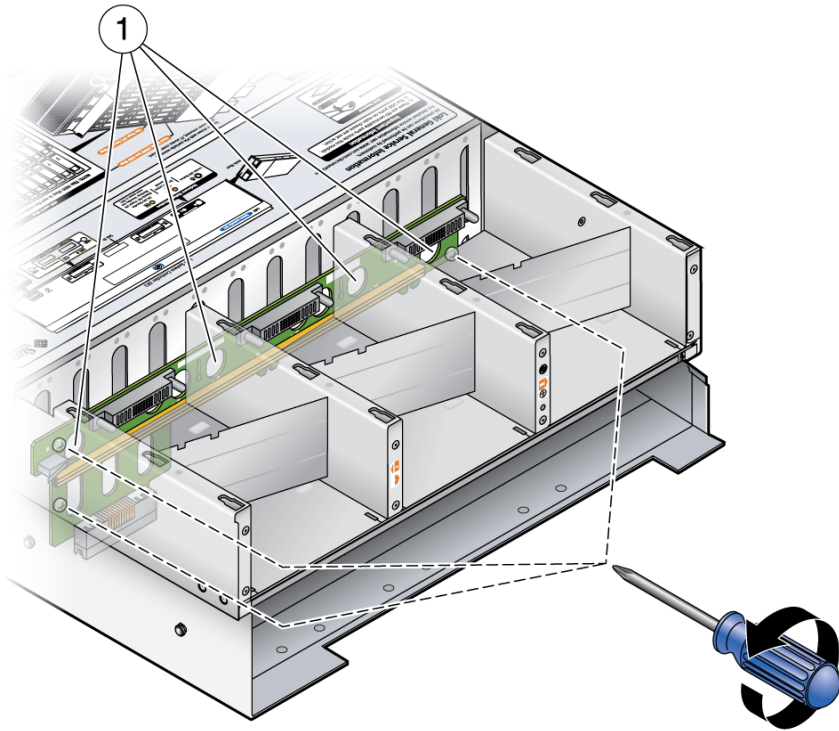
Removing the Rear Chassis Filler Panel
